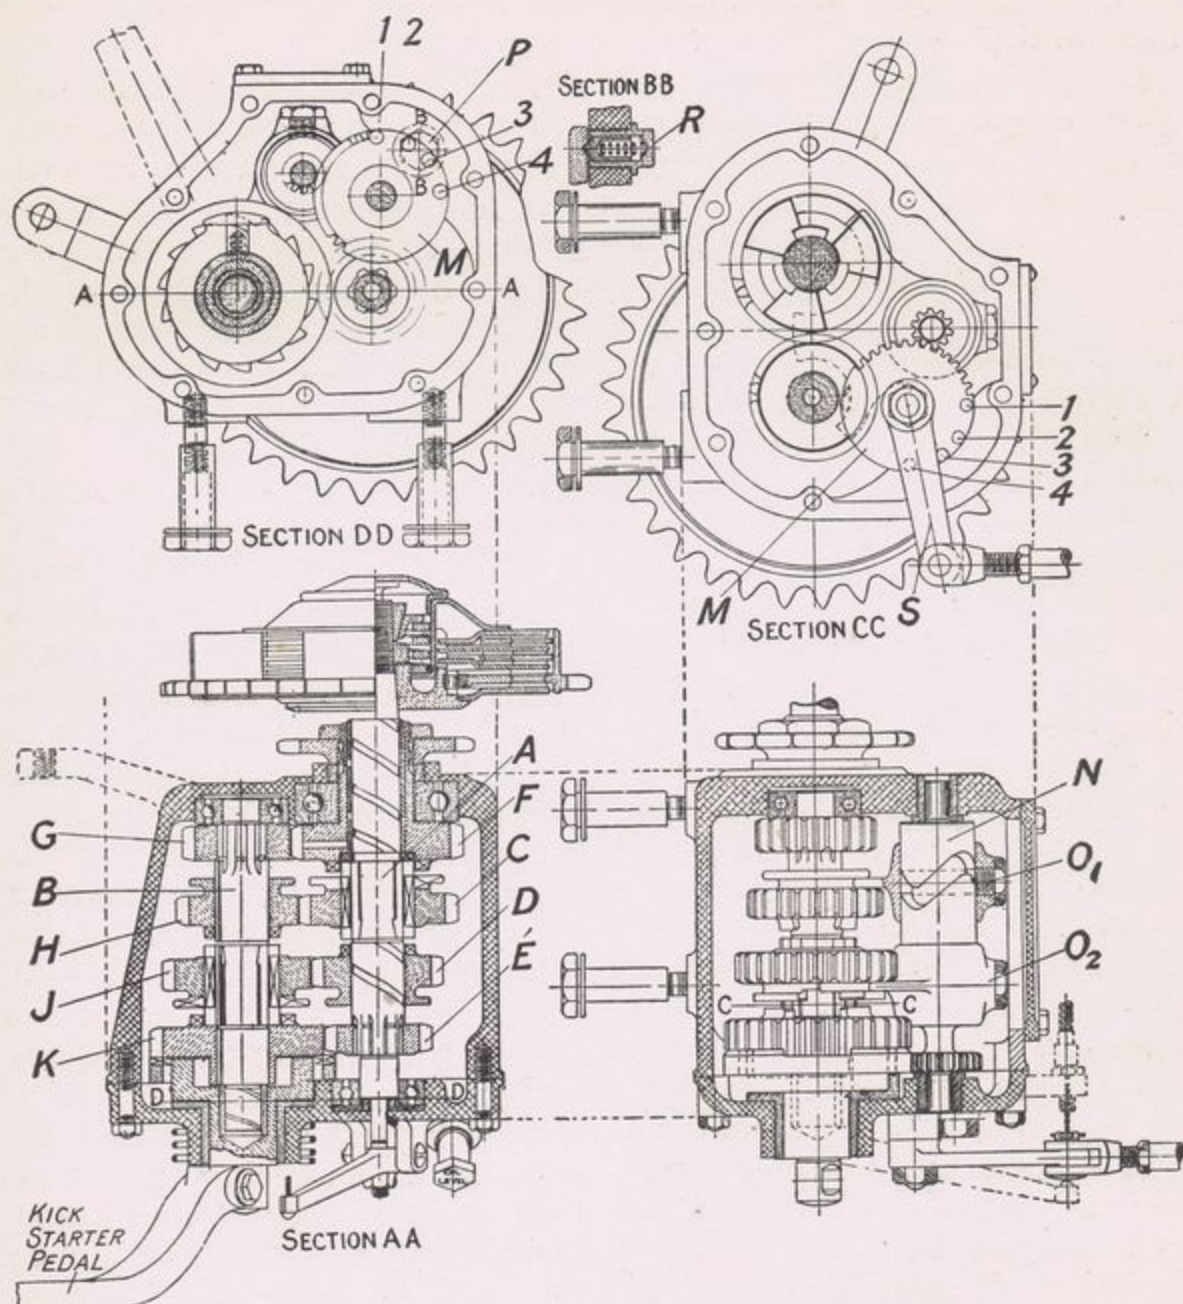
GENERAL ARRANGEMENT OF THE P. & M. FOUR-SPEED GEAR-BOX
